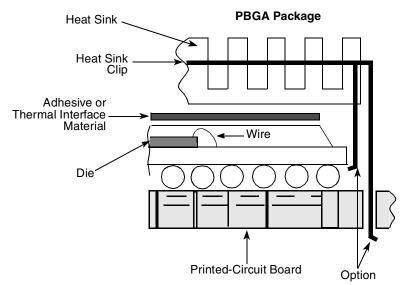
Package Exploded Cross-Sectional View with Several Heat Sink Options
